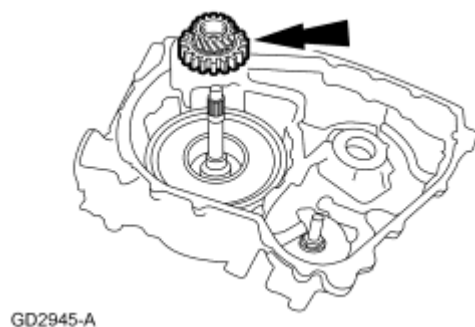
Forward One-Way Clutch & Low/Intermediate Sun Gear Assembly
